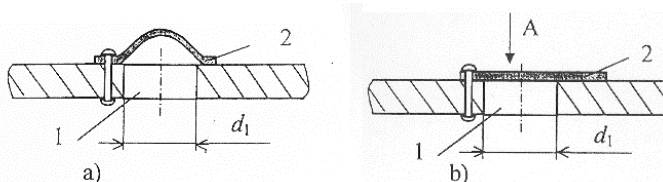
Construction of throttling hole of pneumatic vibroexciter: a) - view up to throttle shape change, b) – view after the throttle shape change.
